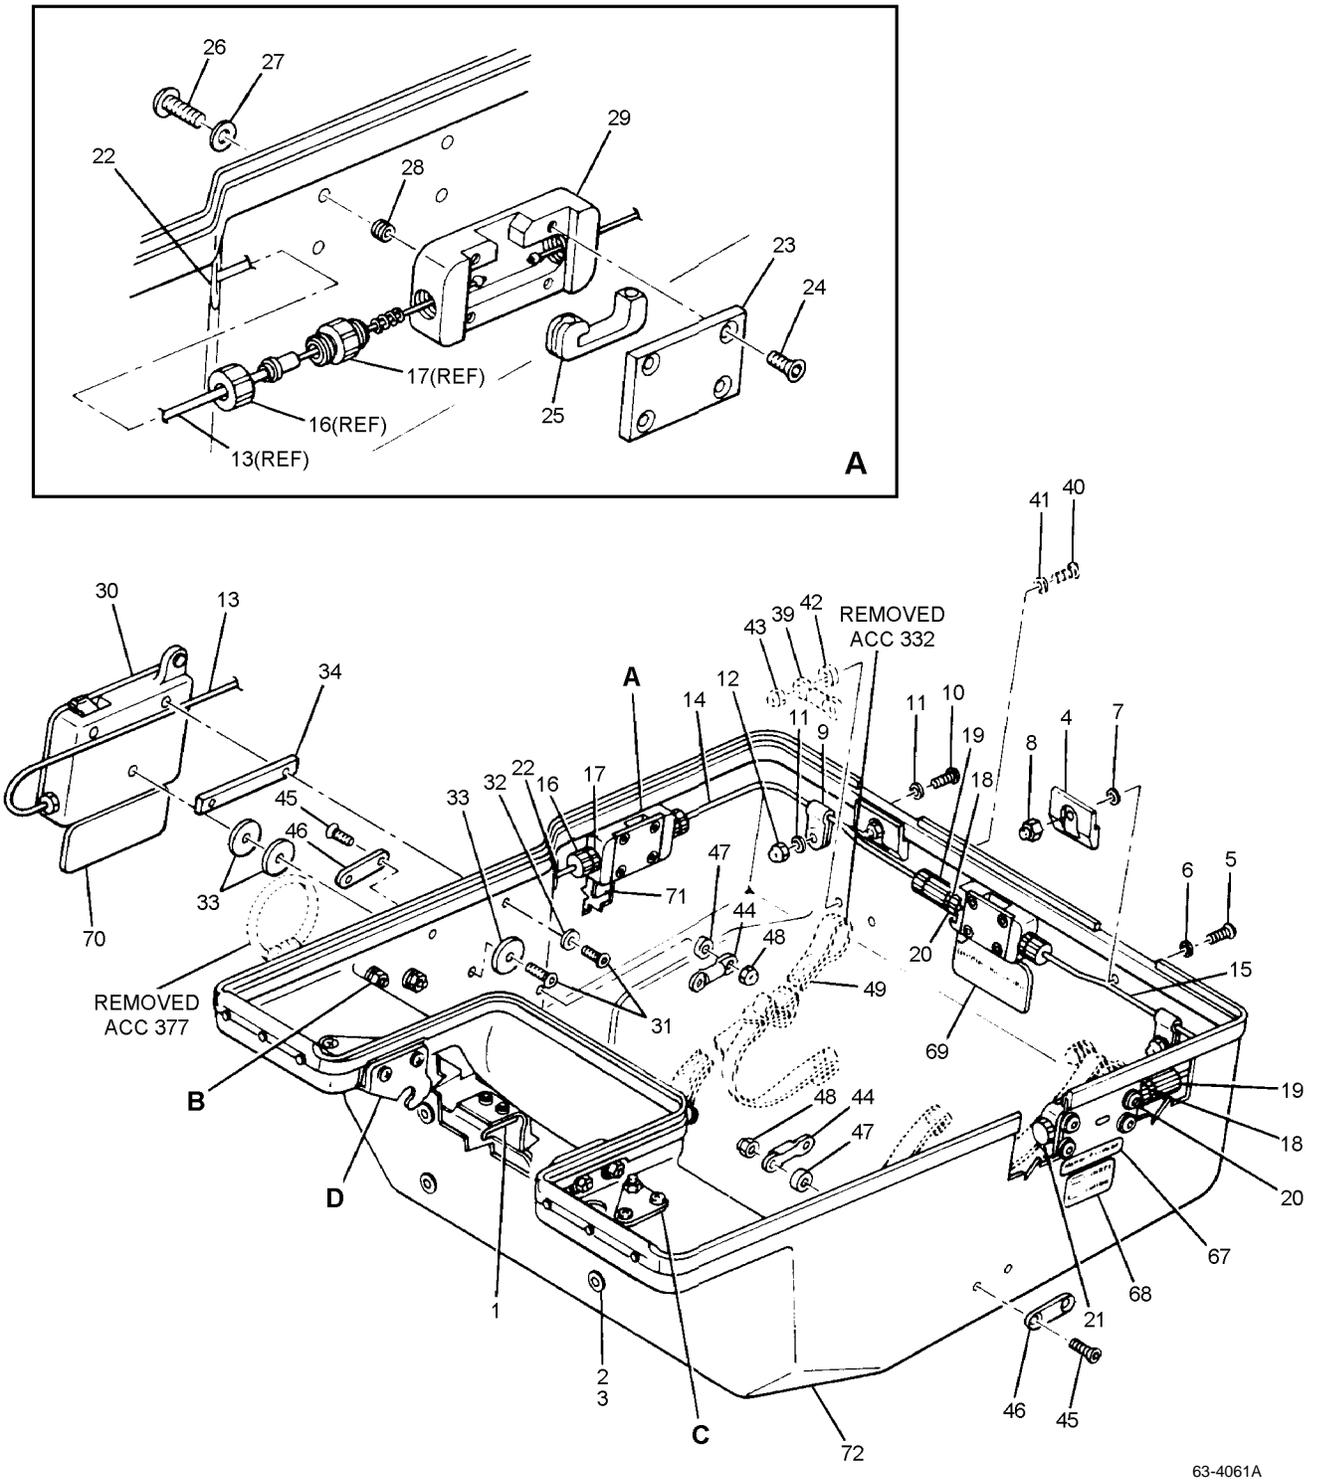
Lower Container Assembly (Scott) (Sheet 1 of 2)
